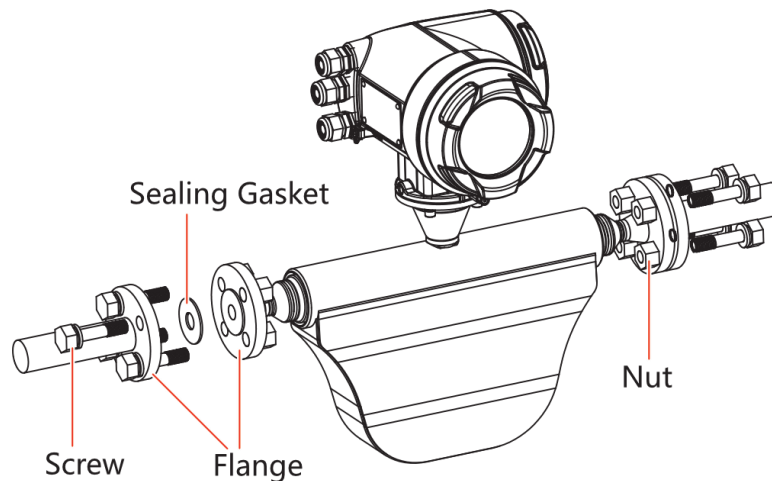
Flanged Connection (taking the integrated type as an example)
